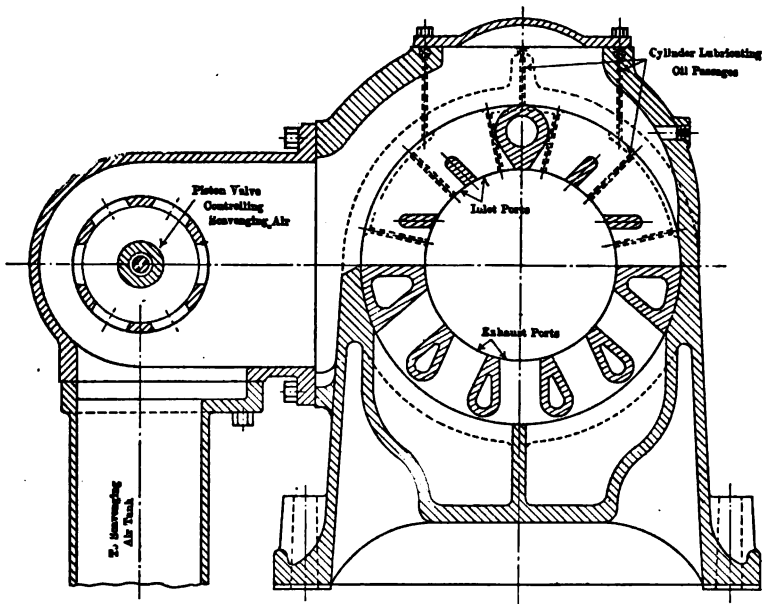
Standard Fuel Oil Diesel section through air and exhaust ports.
